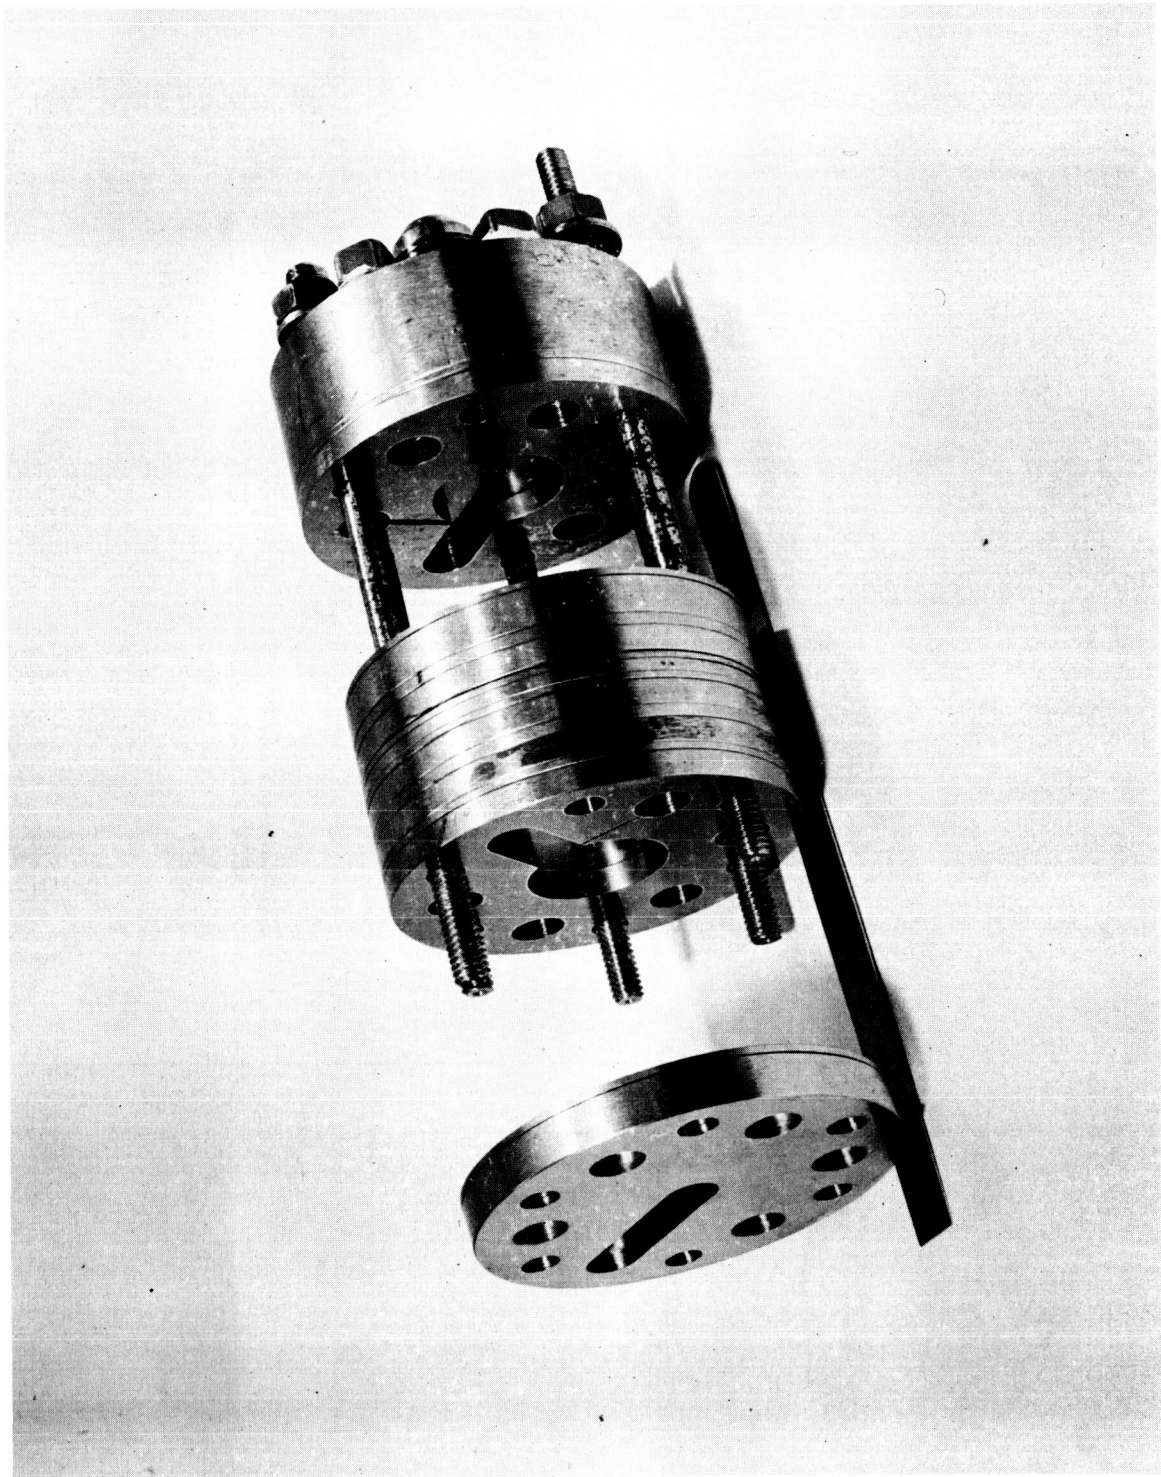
SERVOVALVE - PARTIAL ASSEMBLY
